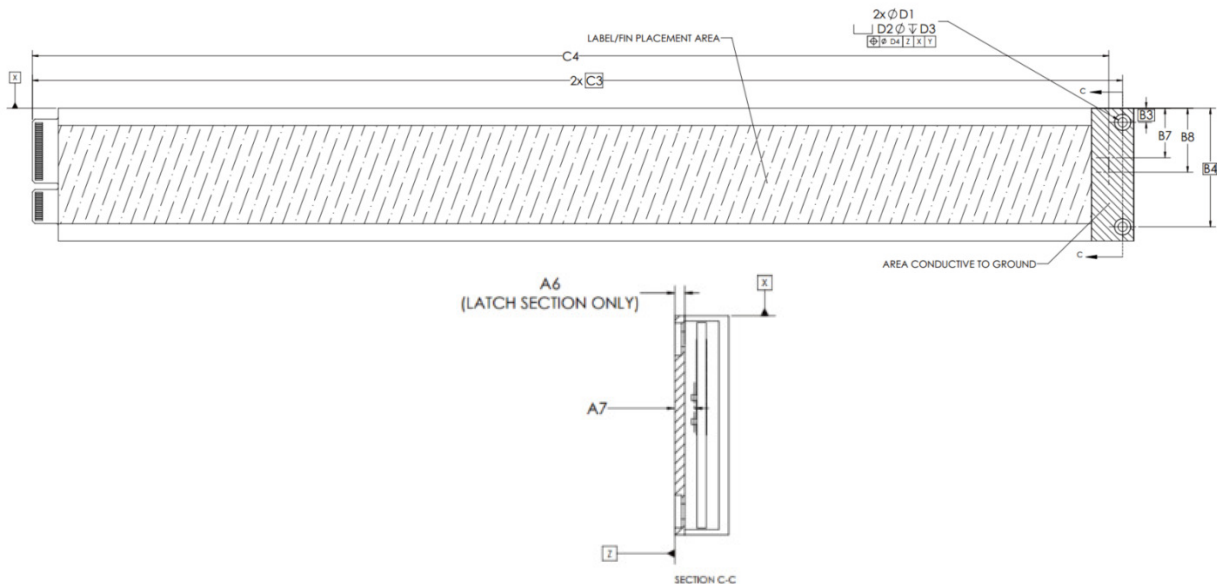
SECONDARY SIDE OF 1U LONG AND LATCH SECTION
